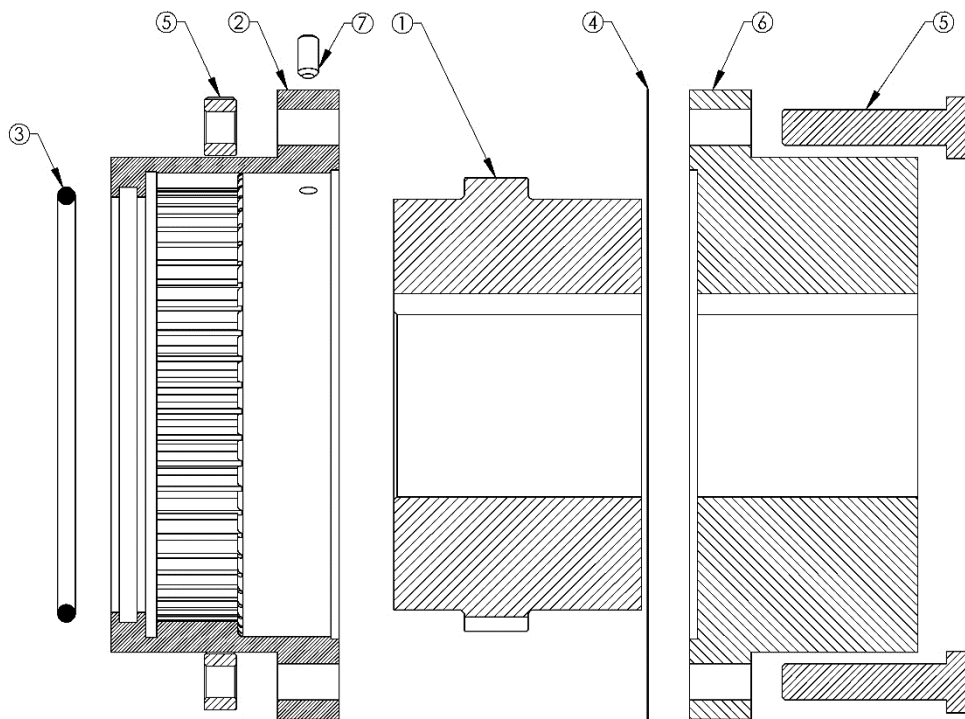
STEEL GEAR SINGLE FLEX COUPLING (EXPLODED VIEW)
